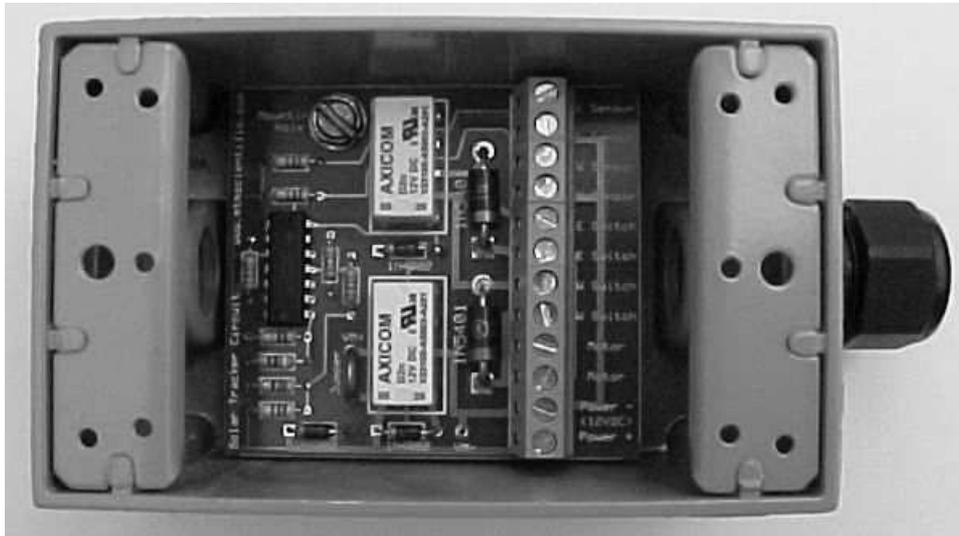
The Solar Tracker circuit board fits inside a standard outdoor box. Be sure to insulate the bottom of the board from making metallic contact.
